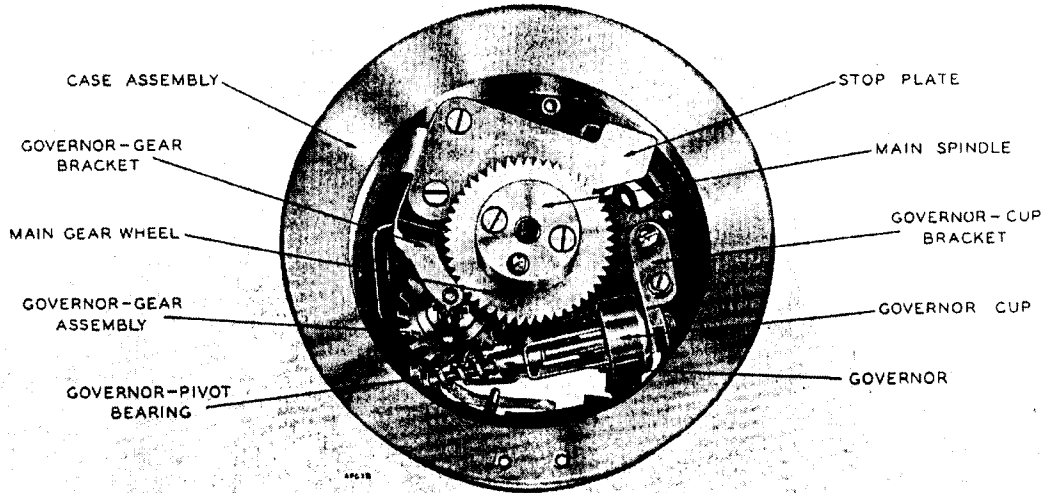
FRONT VIEW (FINGER PLATE REMOVED)
